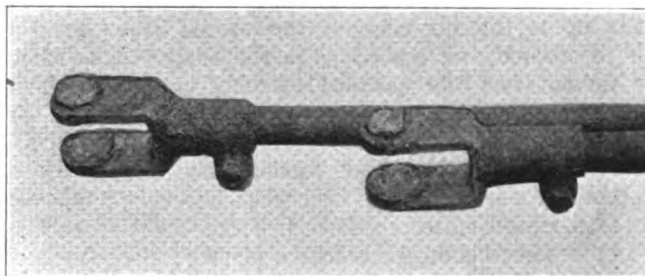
BRONZE WELDED INTO CLEVIS HOLES FOR BUSHINGS
